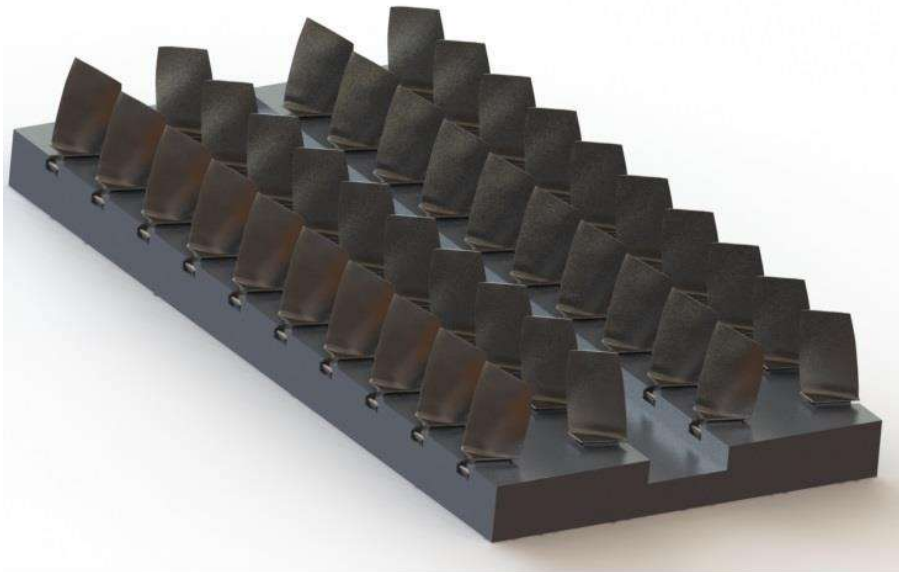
1<sup>st</sup> Stage Tool Design Final Blade Display
